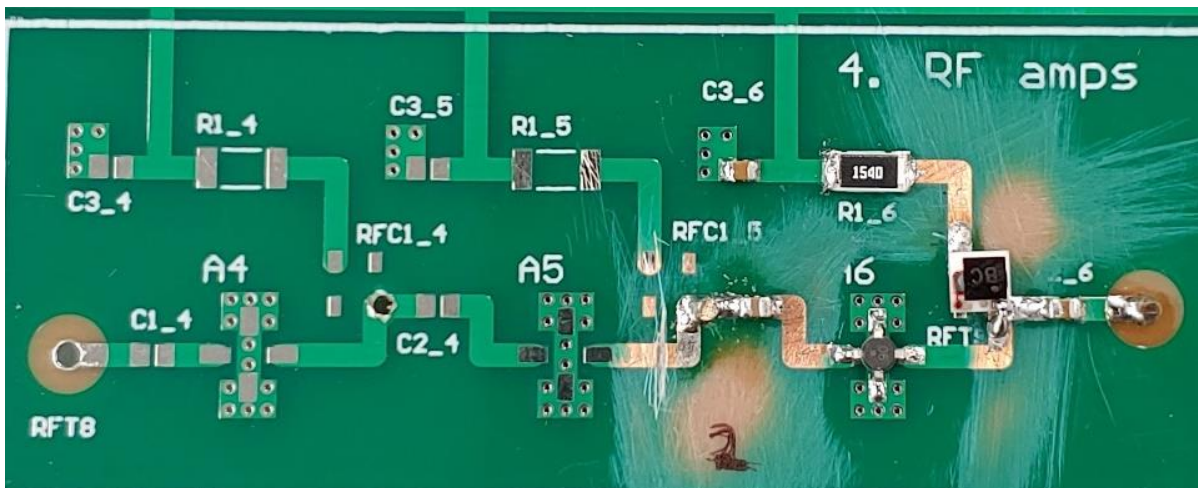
Second cut out MAR-6SM+ from another PCB board
